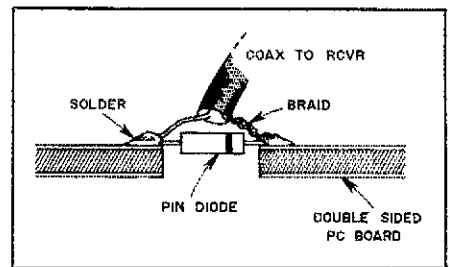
One method of attaching the PIN diodes to the double-sided pc board is shown here. Details are given in the text. The coaxial cable leads to the diode should be no longer than approximately 5 mm (0.2 in.).
